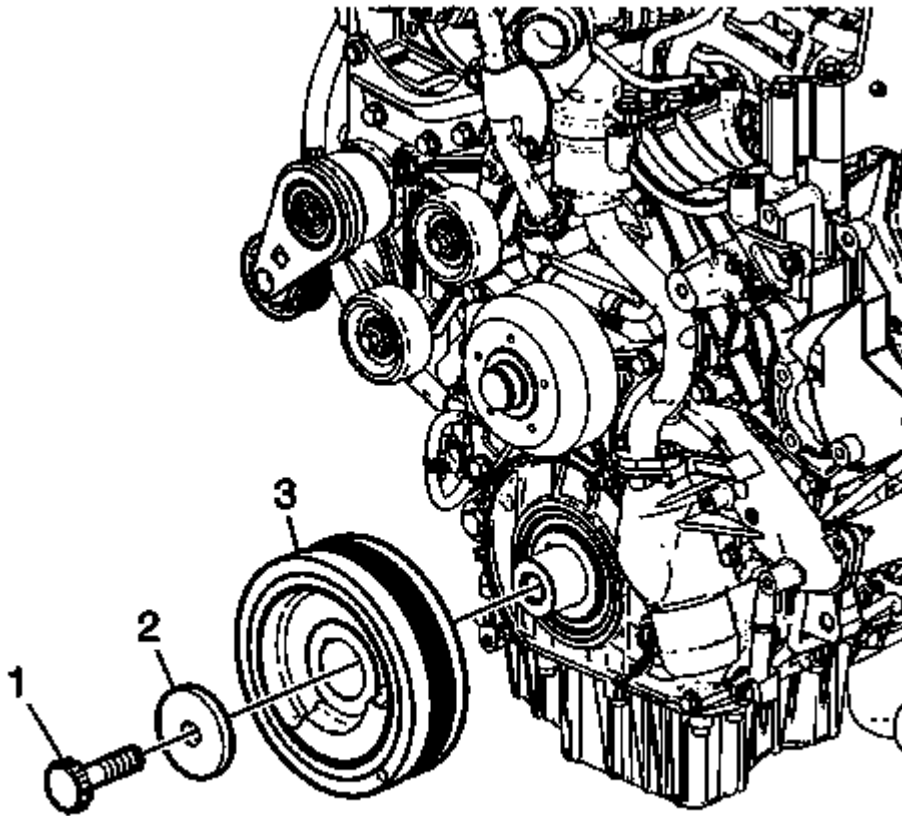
Identifying Crankshaft Balancer, Washer And Bolt
